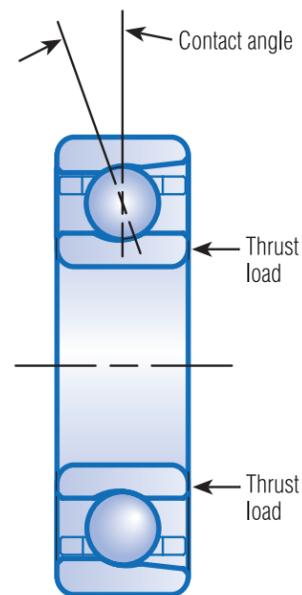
Contact angle refers to the nominal angle between the ball-to-race contact line and a plane through the ball centers, perpendicular to the bearing axis.
